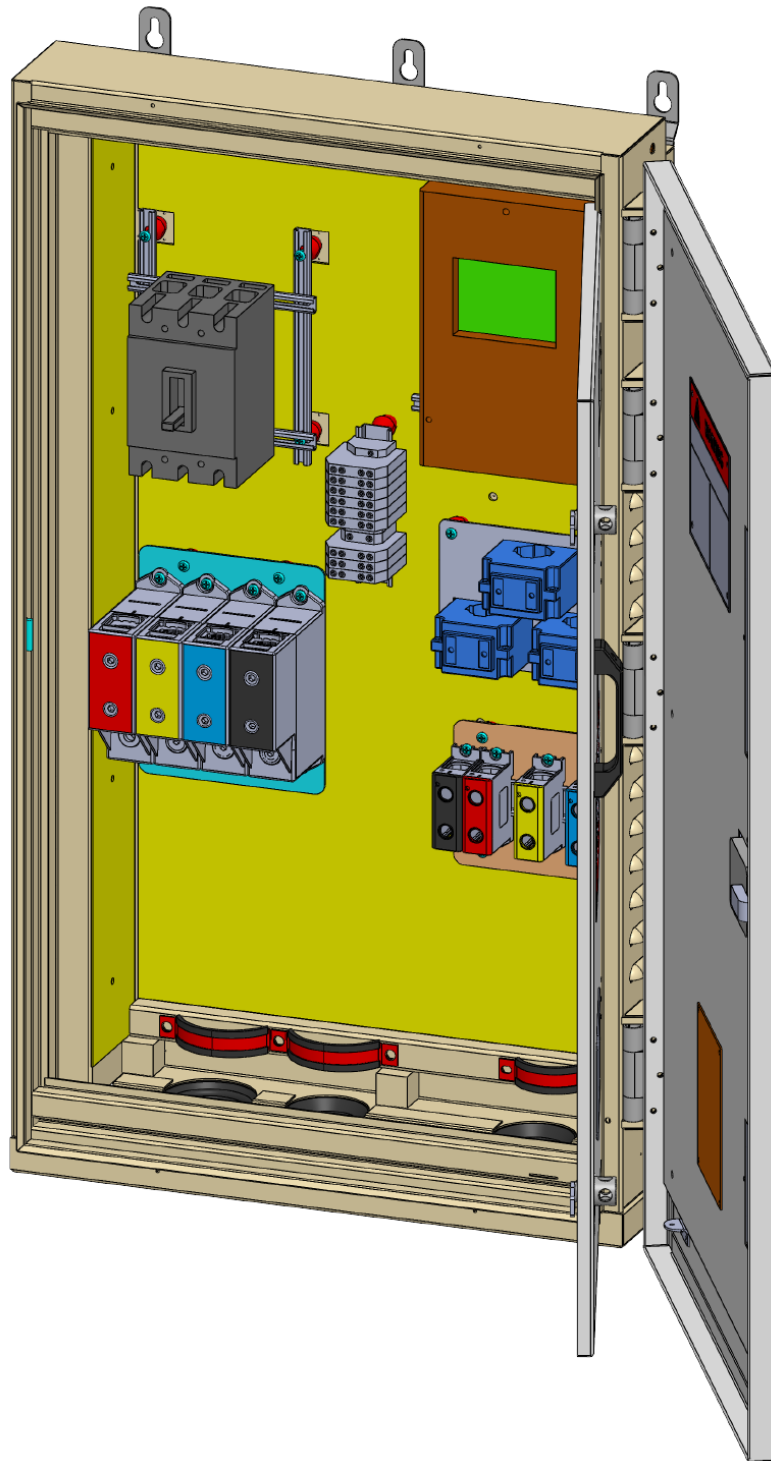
Layout Drawing of 200/250A CT-Meterbox with Steel Enclosure with Main Door Opened
